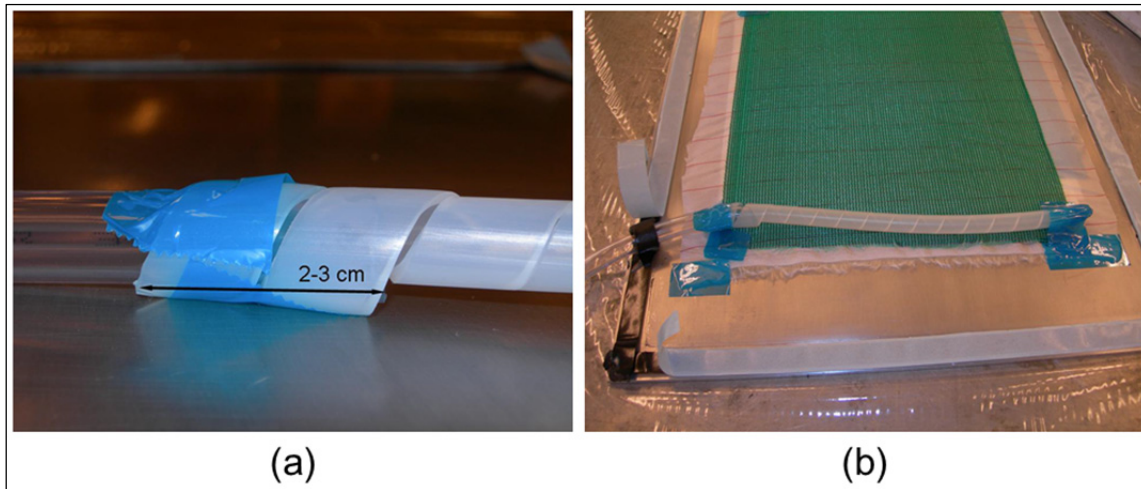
Inlet tube setup: (a) Connection with the spiral tube and (b) Installation
